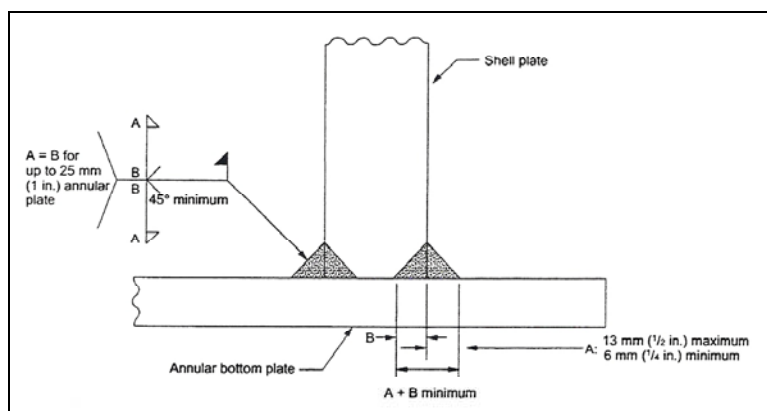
Detail of shell-to-bottom joint (API-650)
